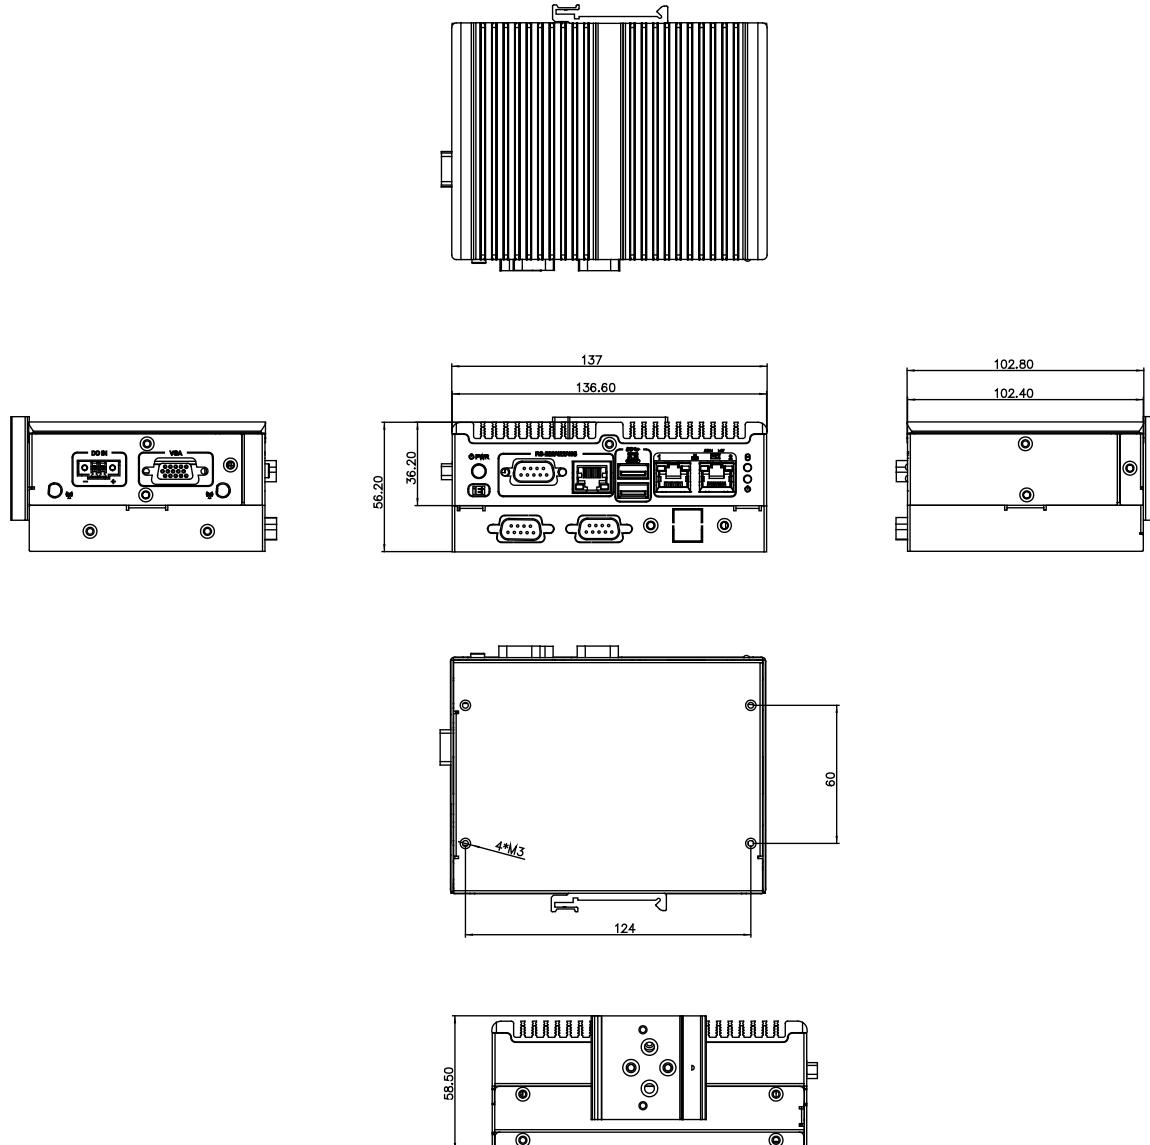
ITG-100-AL-E1 Physical Dimensions (mm)
